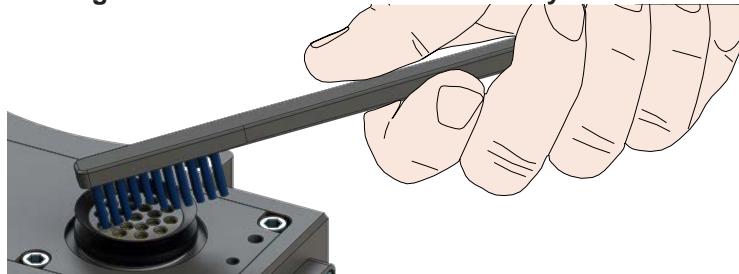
Inspect Master and Tool Pin Blocks
